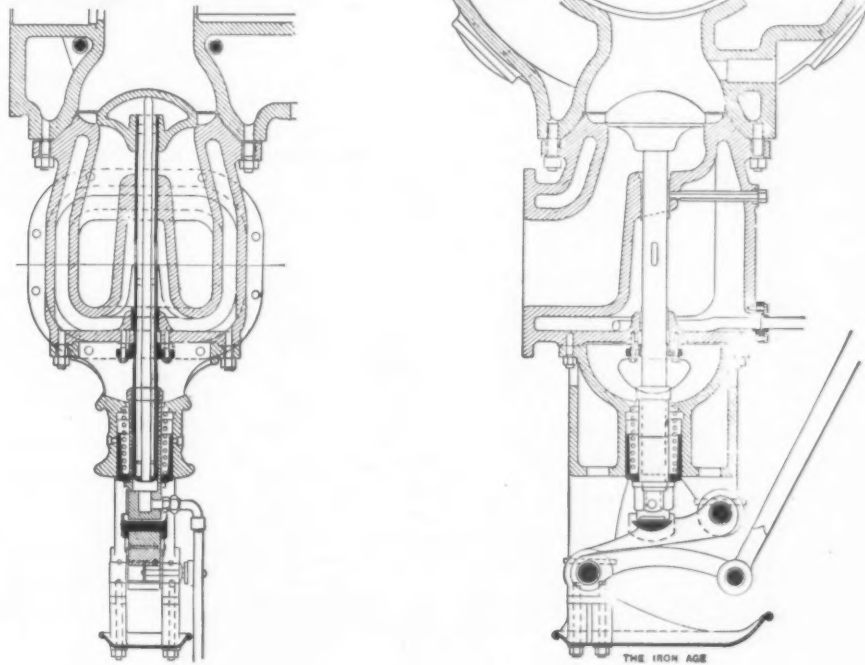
Arrangement and Cooling of Exhaust Valve.
